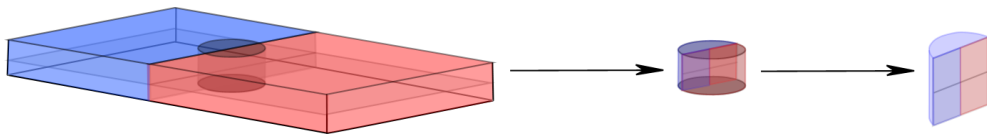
Expanded 3D view of the kinematic model, showing a schematic of the whole workpiece, the weld stir zone, and a cut-away view of the stir zone
